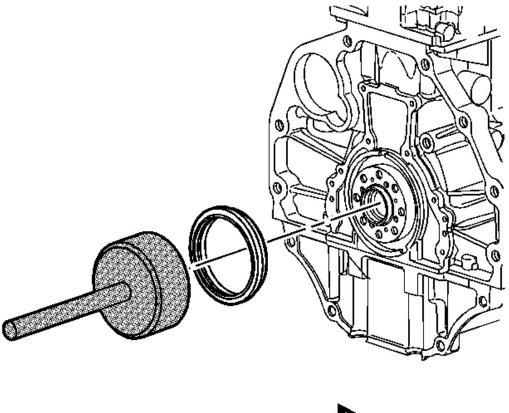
Installing Crankshaft Rear Oil Seal Using J 44227 Courtesy of GENERAL MOTORS CORP.
